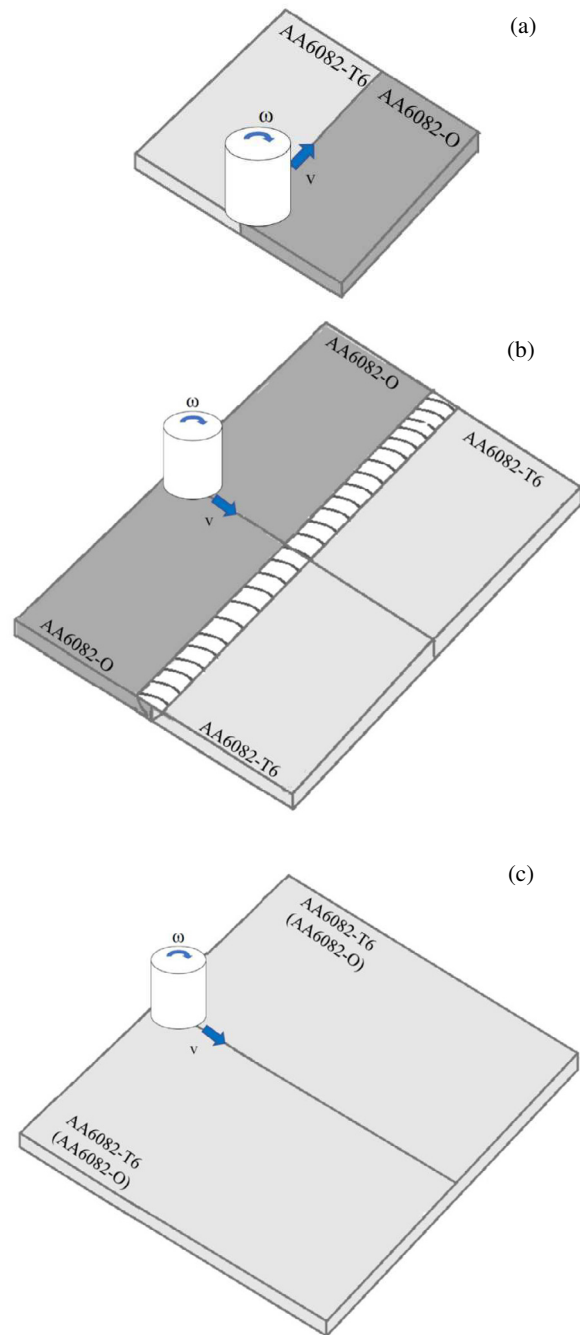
(a) Positioning of the sheet blanks in FSW of dissimilar joints; (b) positioning of dissimilar joints in FSW of blanks with variable mechanical properties along the welding line; (c) positioning of blanks in FSW of similar joints.
